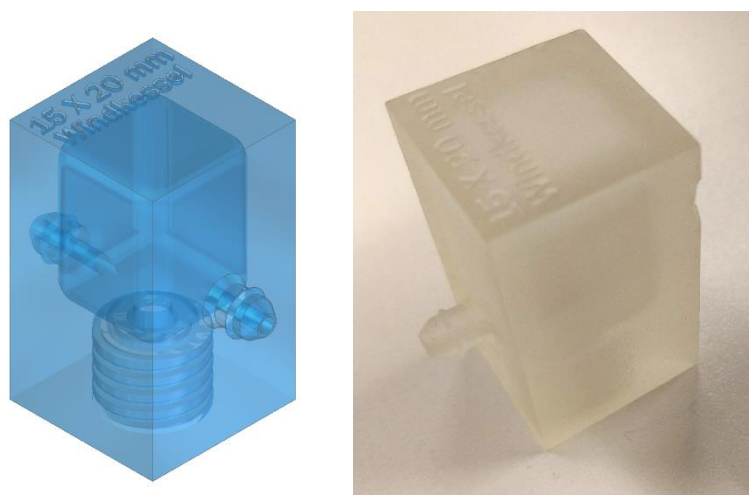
The CAD design of the windkessel and the 3D printed part.
